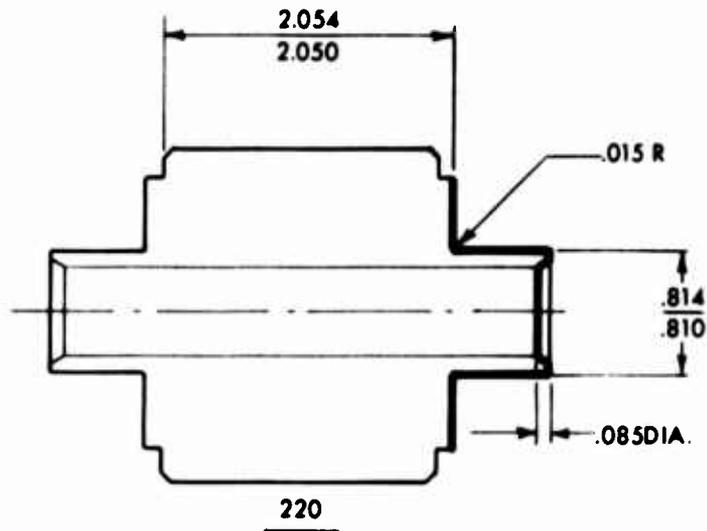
RG351-11182-105, Machine Operation Drawing.
